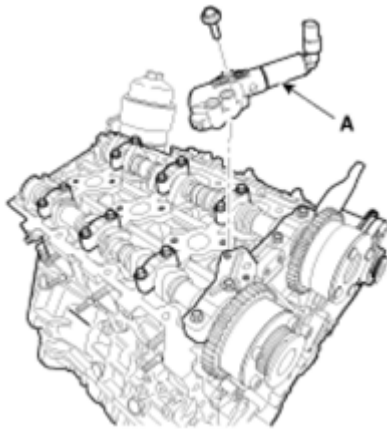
Identifying LH/RH Exhaust Camshaft OCV
